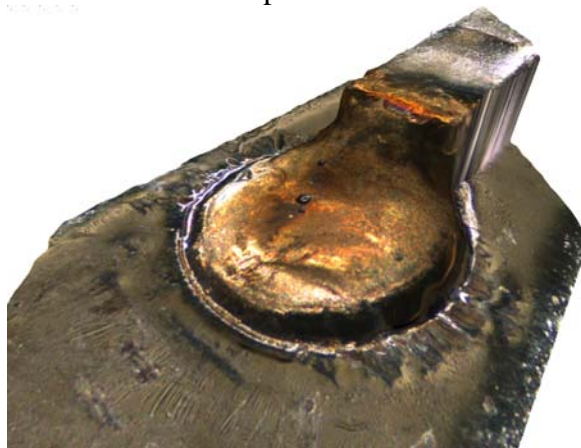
The robust measurement of surfaces with steep flanks and extreme reflections make the Infinite Focus to a very suitable tool for welding spot checks.
